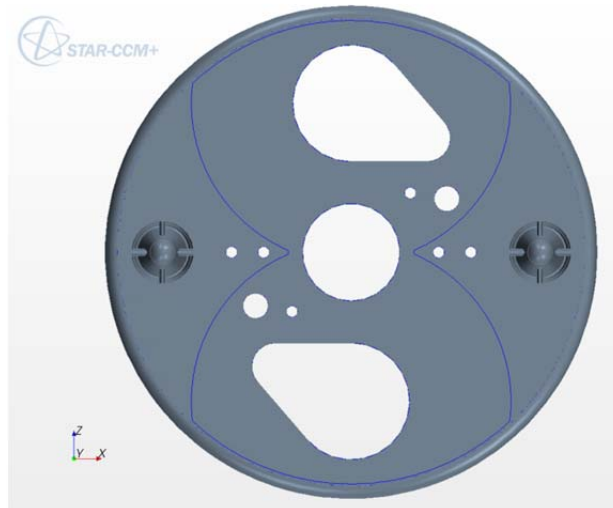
CFD geometry. Lower plate part with pumps inserted.
